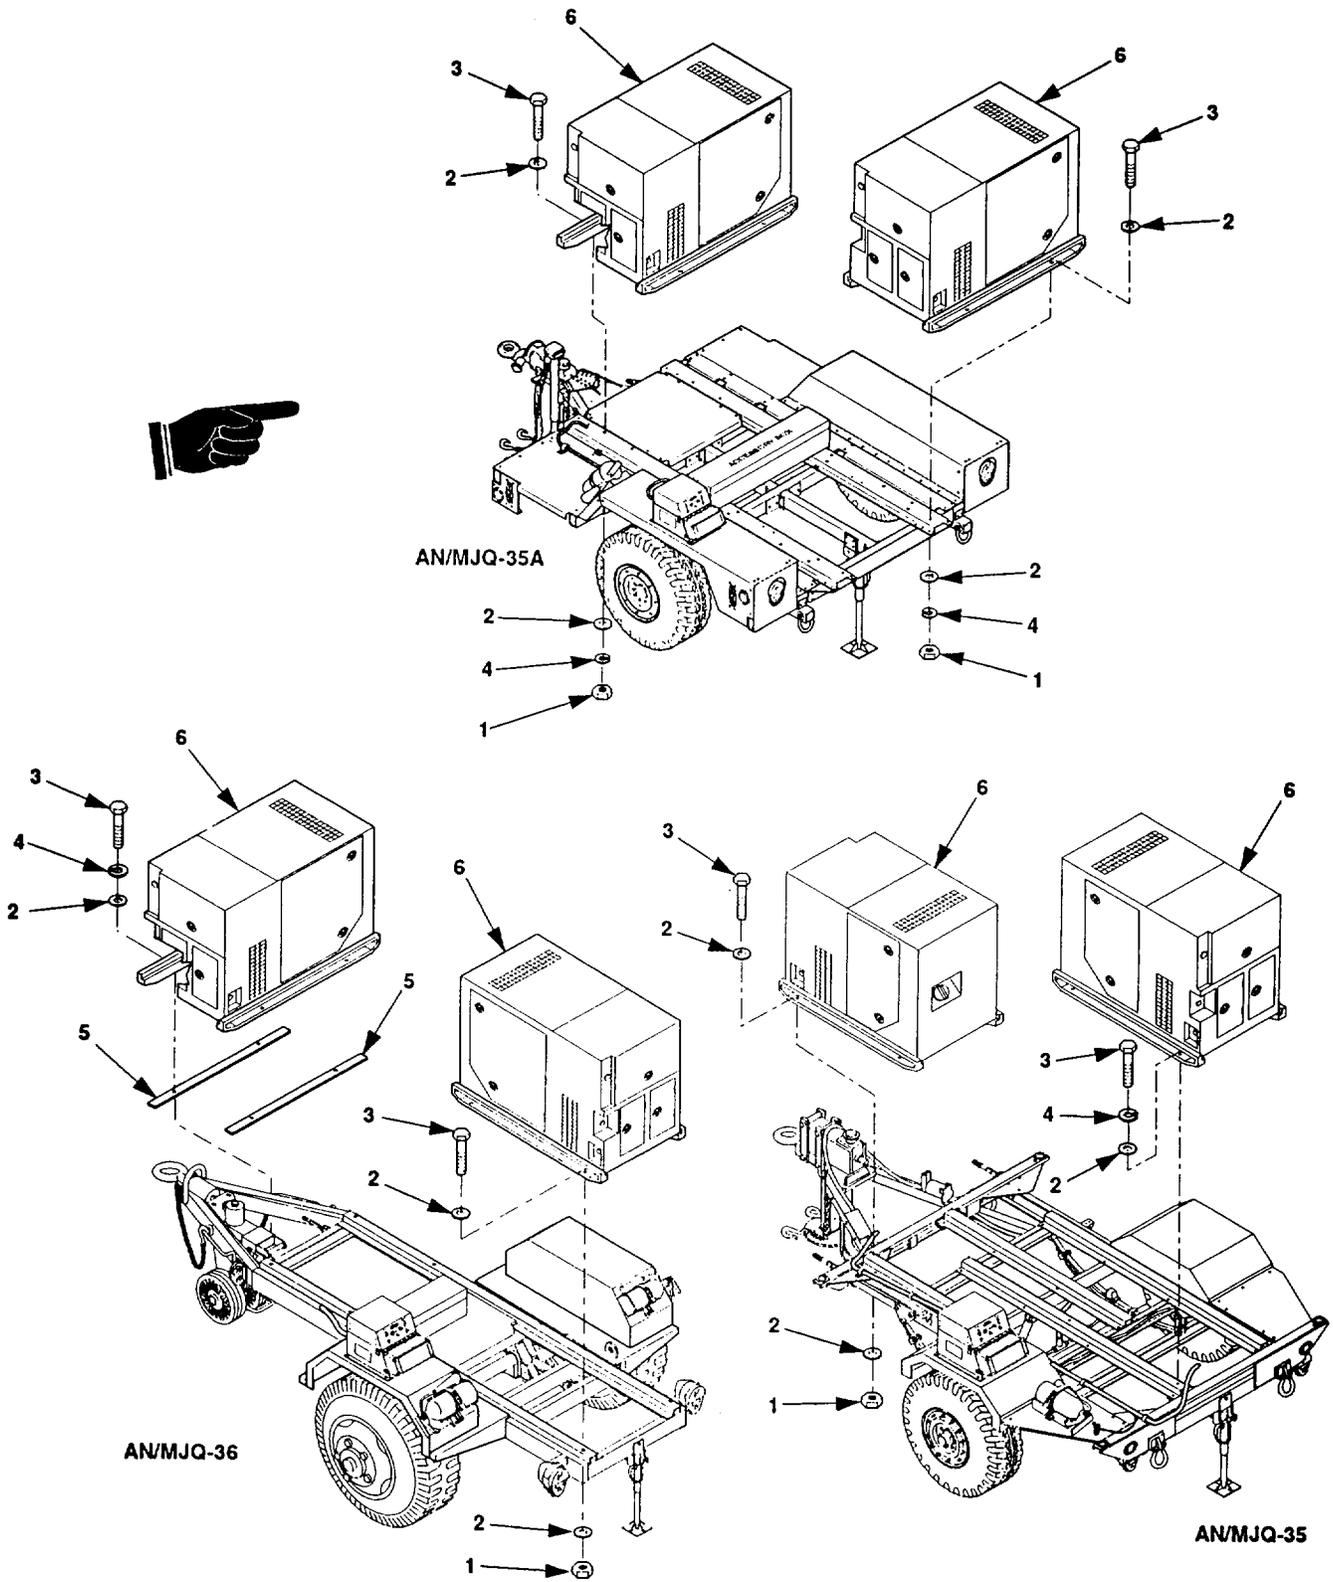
Removing Generator Set Mounting Hardware (Sheet 1 of 2).
